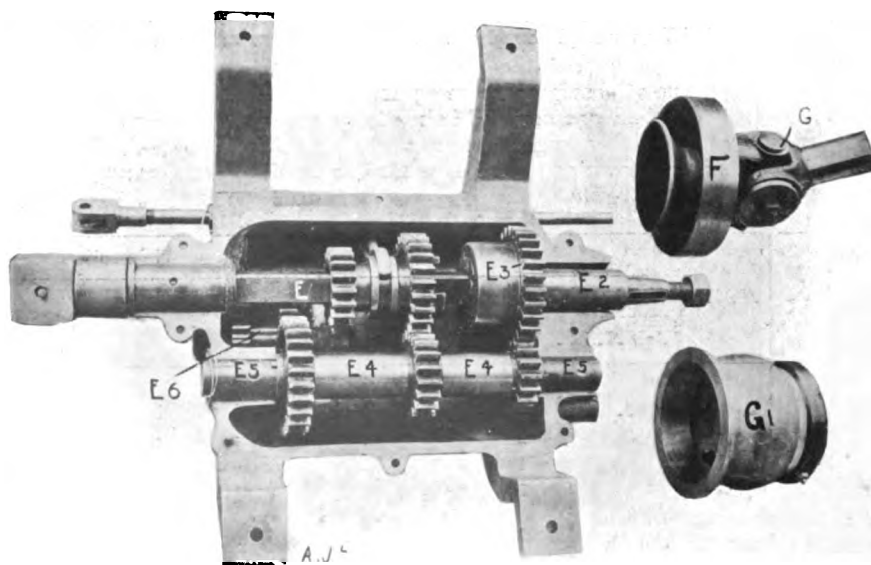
View of the Simms Gear-box, showing the brake-drum, F, and the cover, G^1 , for the universal joint, G.
